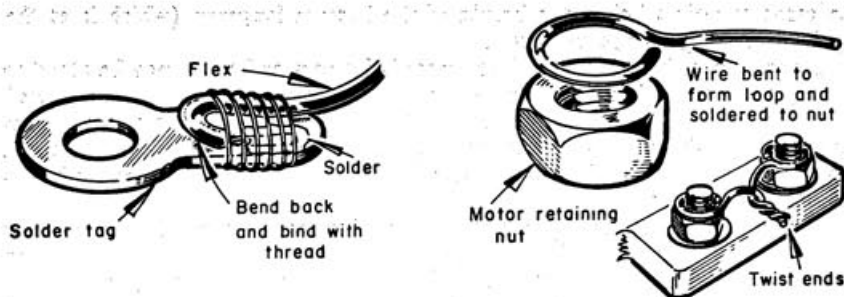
The importance of sound soldered joints can never be overestimated. Left hand sketch above shows a solder joint bound with thread, the actual joint taking no load. At right is a simple method of retaining nuts on engine mounting bolts. Engine vibration does not loosen the nuts.
